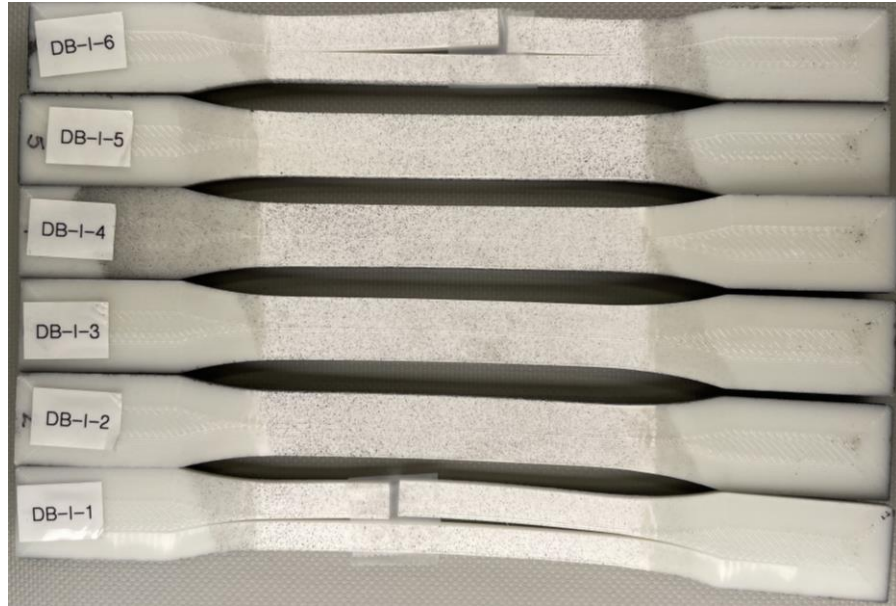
3D-printed ASTM D638 Type I specimens after tensile testing (non-painted side).
